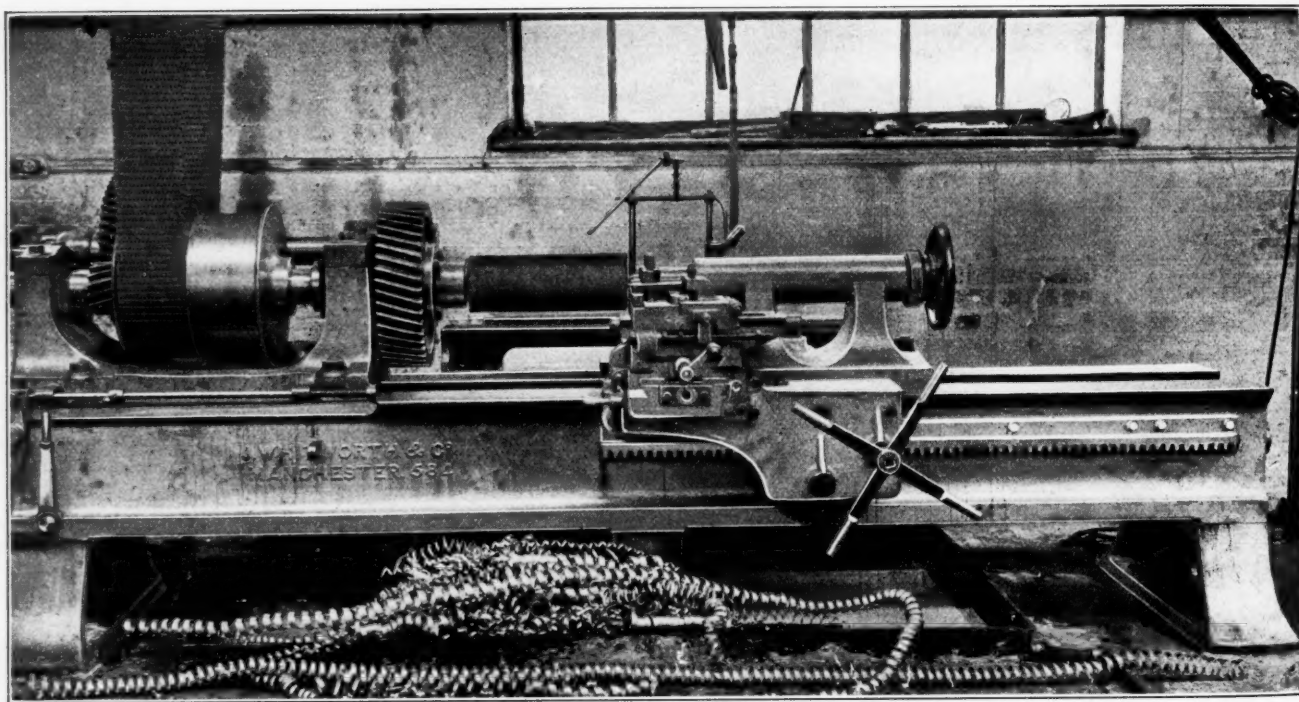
Lathe used for Turning Armor Bolts. Removed 2,480 pounds of Steel Chips in ten hours.
